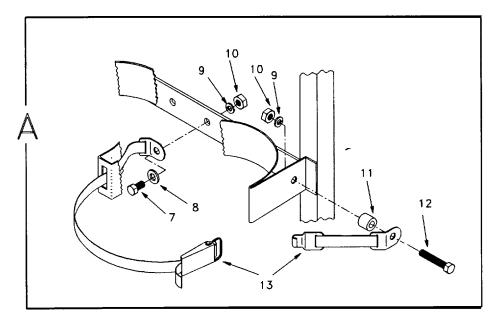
HAND TRUCK ASSEMBLY (CA033) (1 of 2)
